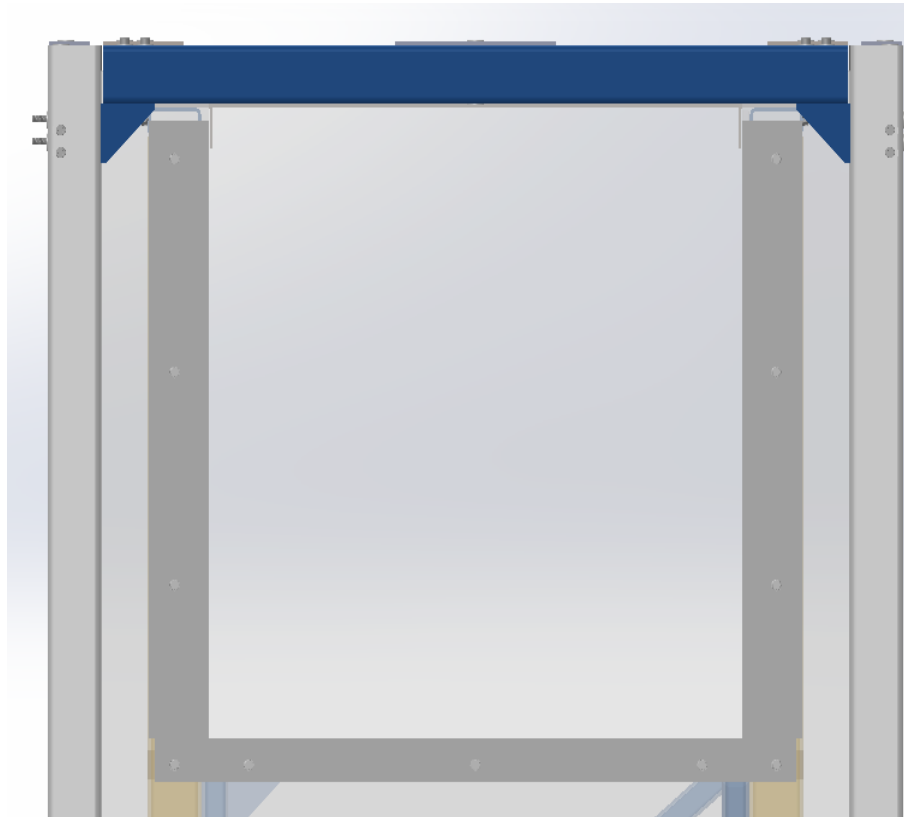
Angle beam to horizontal member bolt connection.
